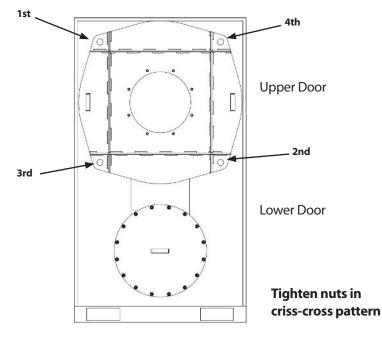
VERIFYING TORQUE SETTINGS (FRONT VIEW, PANELS REMOVED) VTG-2000 THROUGH VTG-5000
